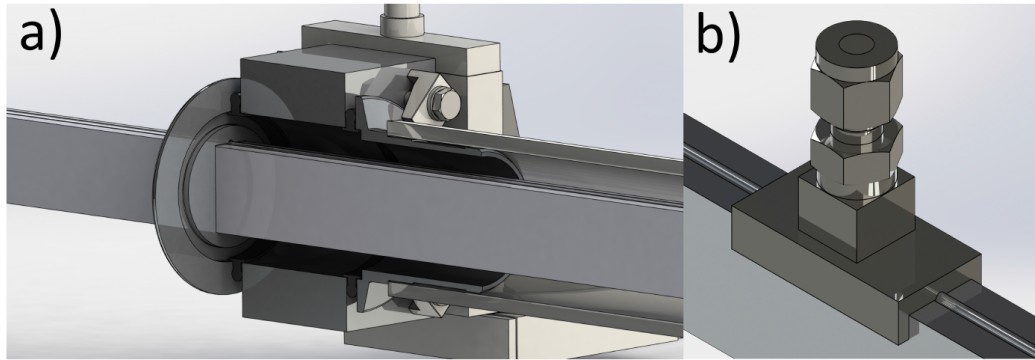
a) Detailed view of a hollow-core fiber support mount, where a special flange carries the steel rod with the fiber on top. b) Gas inlet part on top of the fiber with a gas connector on top. Taken from [161].
